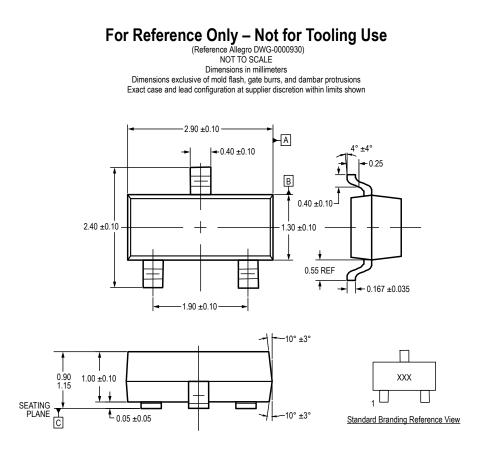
Package MD, 3-Pin SMD (SOT23-3)
